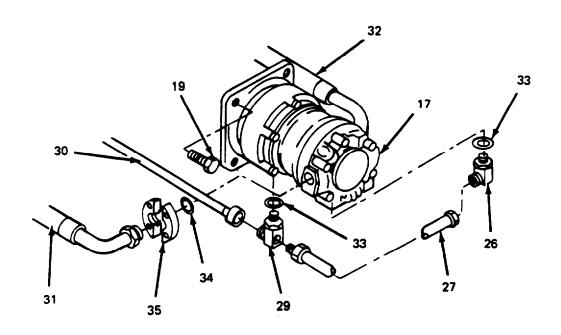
Remove/Install Hydraulic Motor (Sheet 1 of 2).
